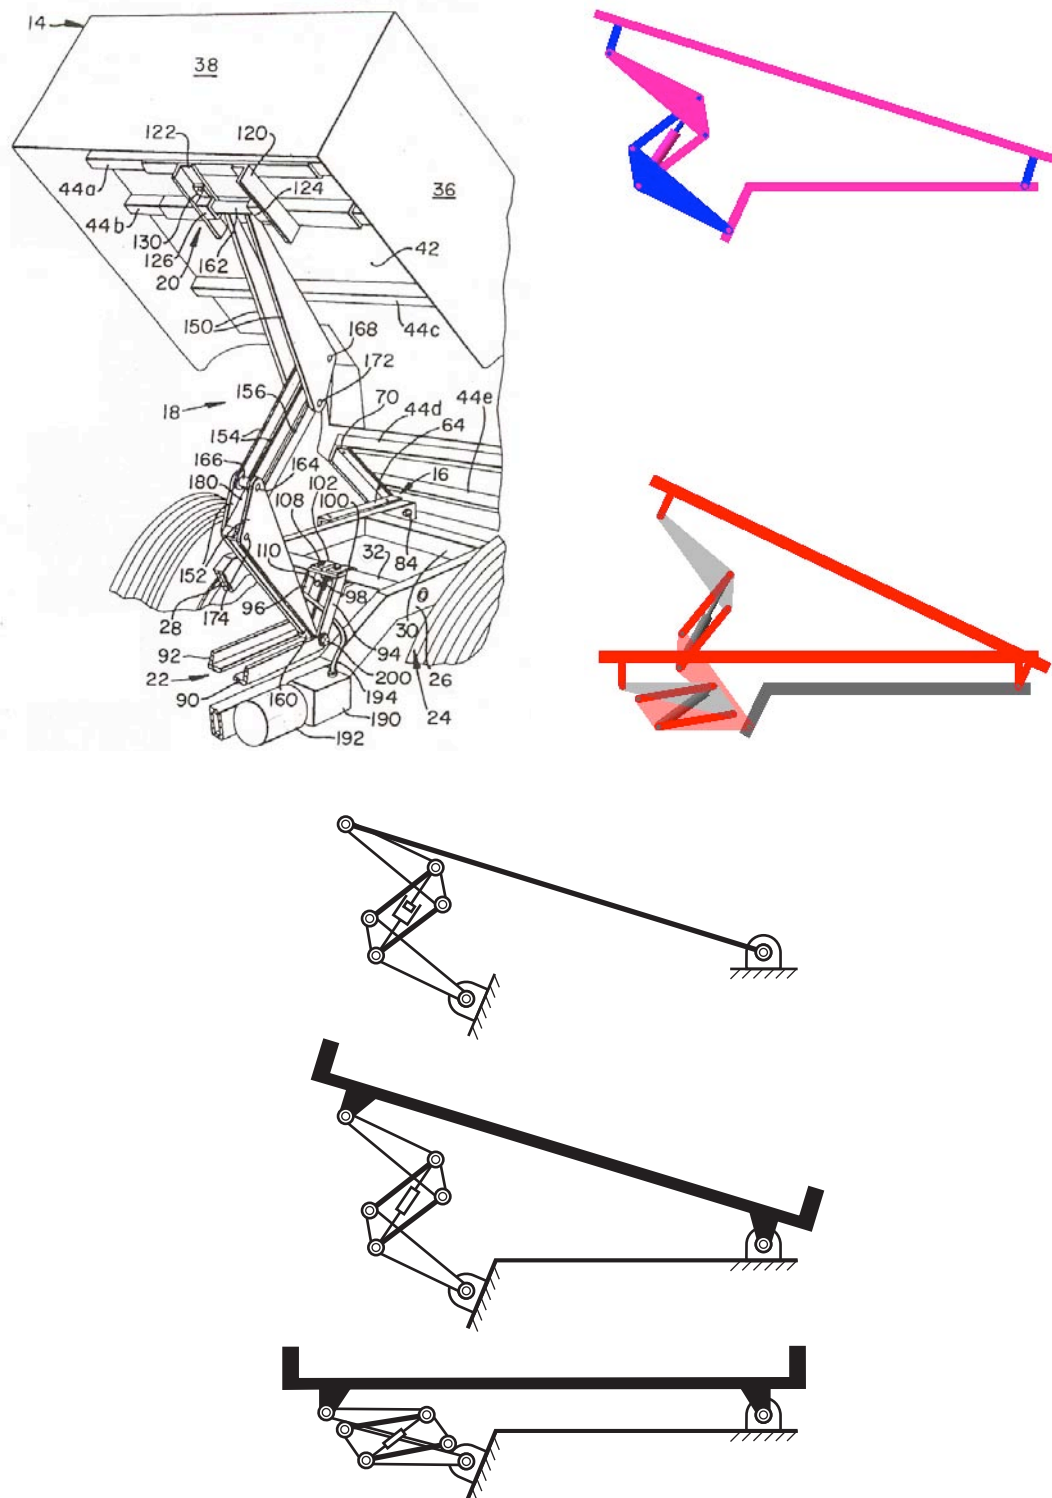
(a) Truck bed-tilting mechanism (taken from U.S. Patent 4,066, 296. (b) Kinematic diagram of the mechanism. (c) mechanism shown in the rest and full-tilt positions. (d) Basic kinematic chain of the mechanism.
